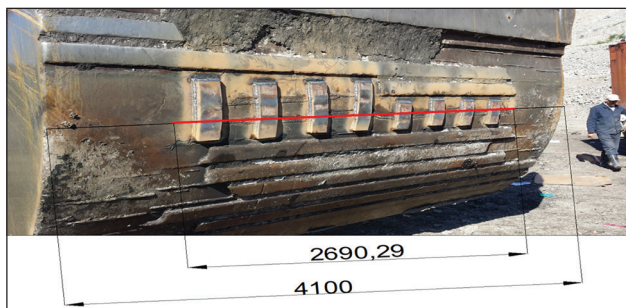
Cross section - location on excavator bucket, welded with vertical and horizontal reinforcements (largest excavator bucket floor cracks)
